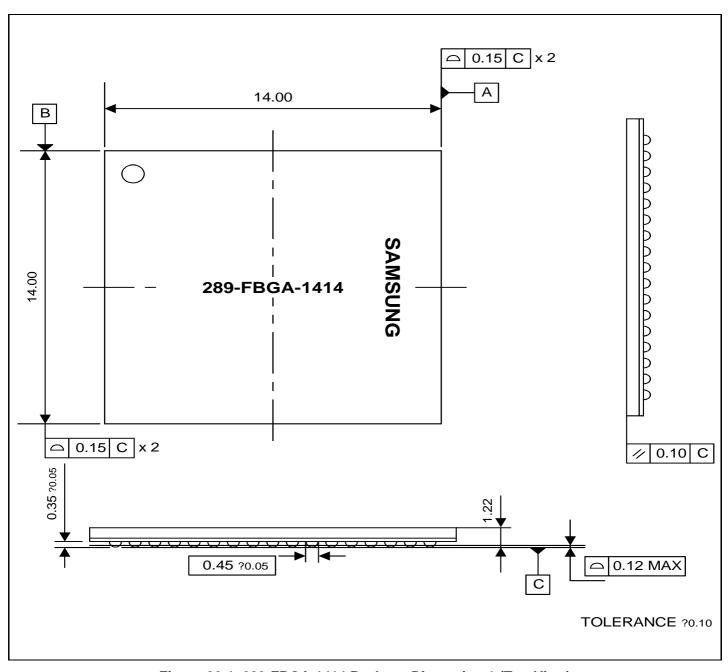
289-FBGA-1414 Package Dimension 1 (Top View)
